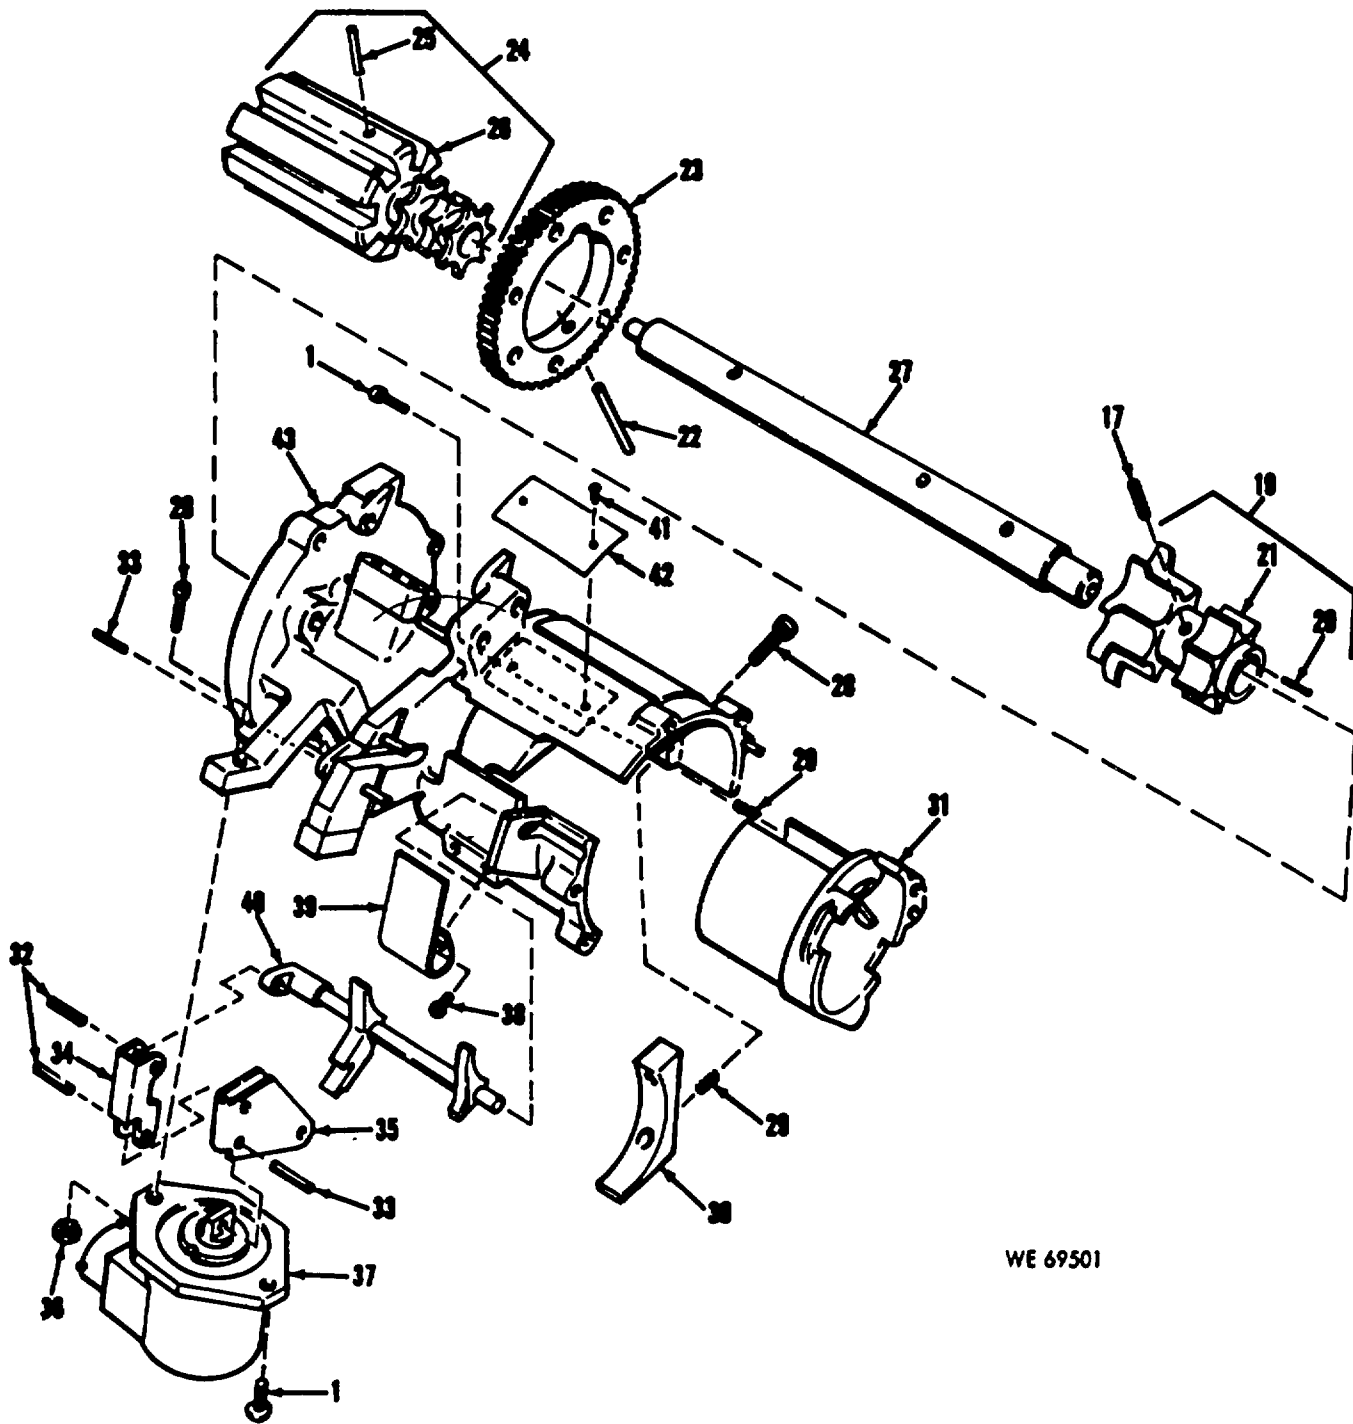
Delinking feeder MAU-56/A-exploded view (sheet 1 of 2).
